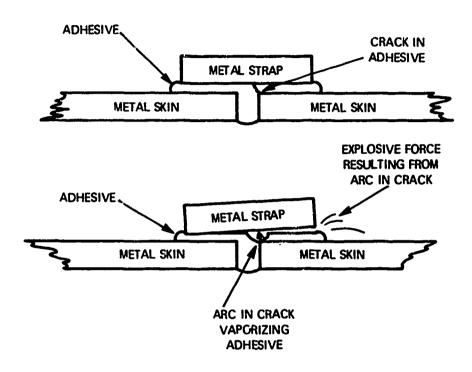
ADHESIVE BONDED STRAP JOINT DAMAGED BY INTERNAL ARC ACCOMPANYING LIGHTNING STRIKE
